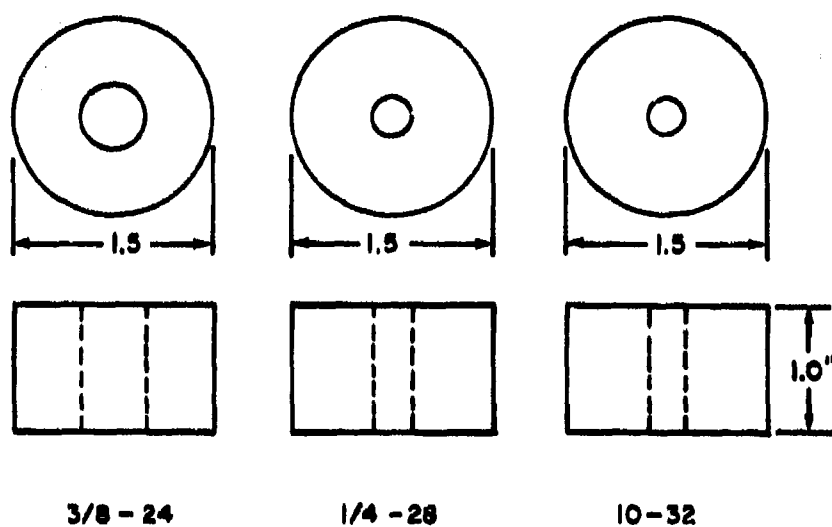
Insert Pull Out Specimens and Corrosion Specimen
